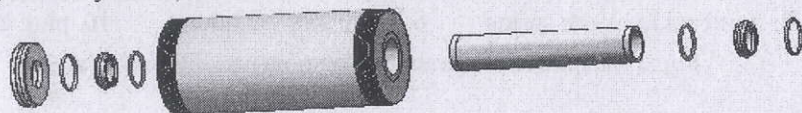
Exploded Diagram of Components of HP Cylinder
